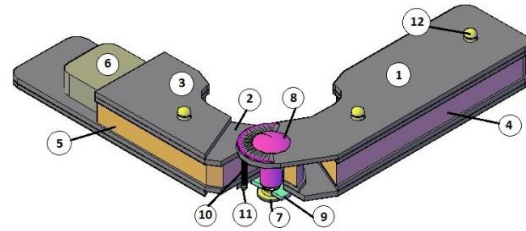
Components Parts of Elbow Fixture Welding Process
